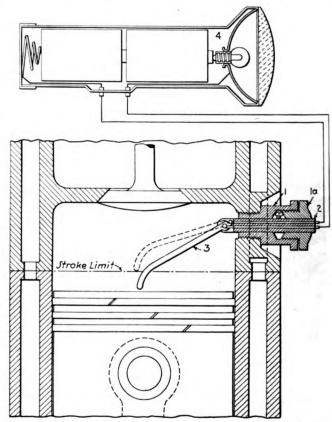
Device for locating dead centers and timing ignition of internal-combustion engines
